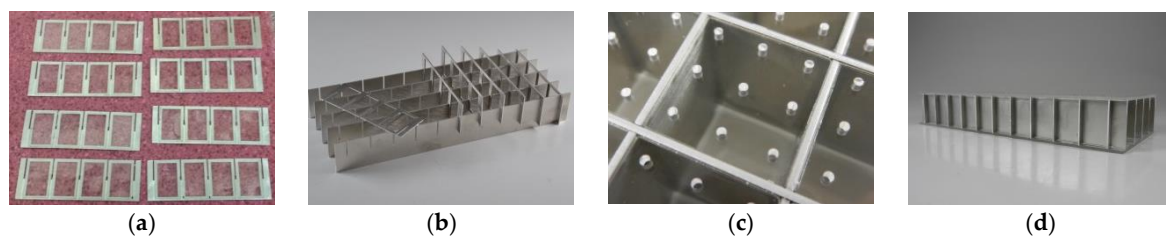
Manufacturing of acoustic liner samples: (a) adhesive bonding of films; (b) assembling of support structure; (c) attachment of face sheet; (d) acoustic liner sample.
